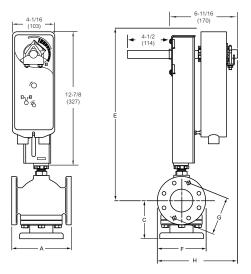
Mx41-715x with Flanged 3-Way Globe Valves
